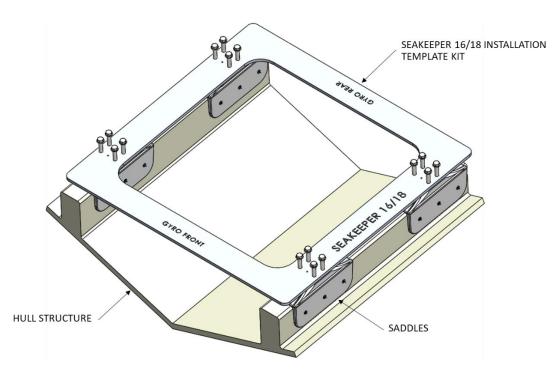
EXPLODED VIEW OF SADDLE INSTALLATION FIXTURE
